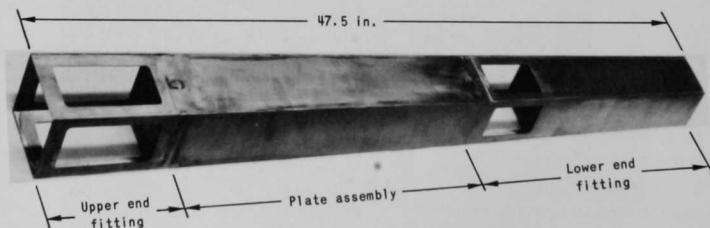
Full-scale AARR Dummy Fuel Subassembly Fabricated Completely by Brazing
